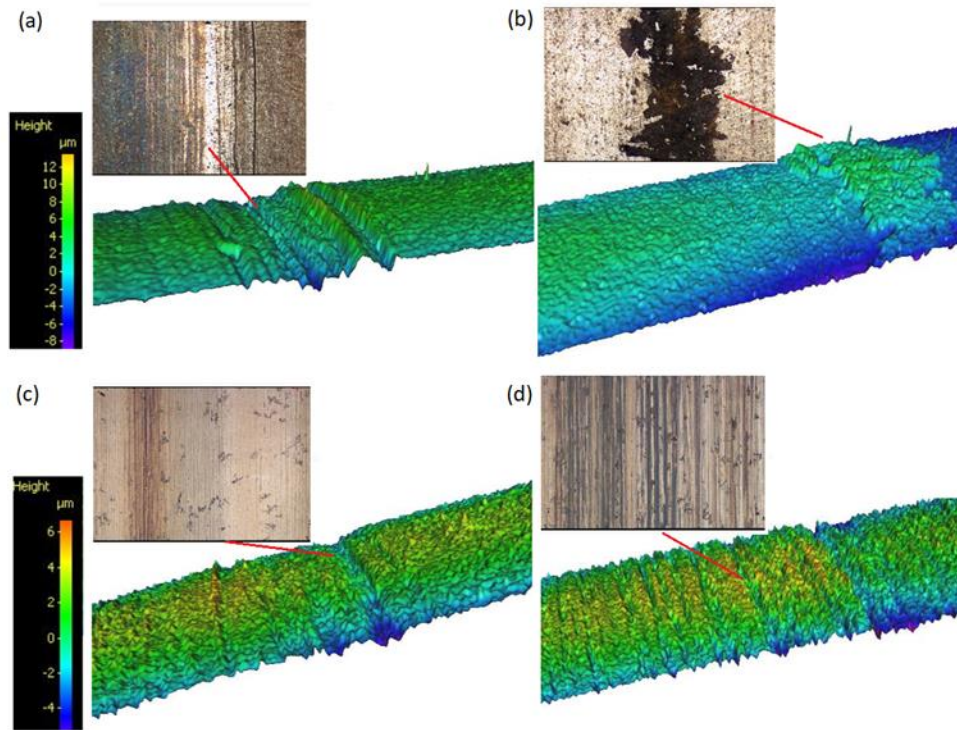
Surface topography of the damage (a) and (b) un-lubricated (c) and (d) lubricated bearings.
